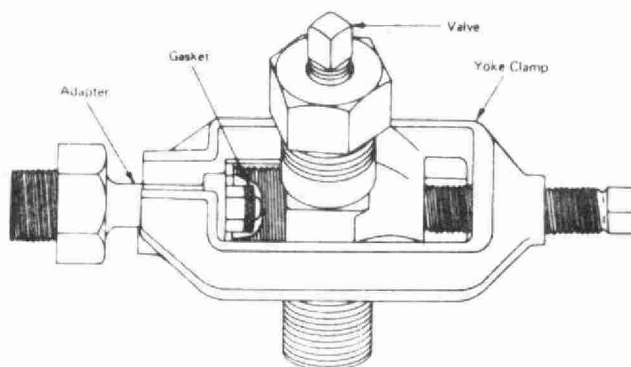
VALVE CLAMP AND ADAPTER ASSEMBLY
